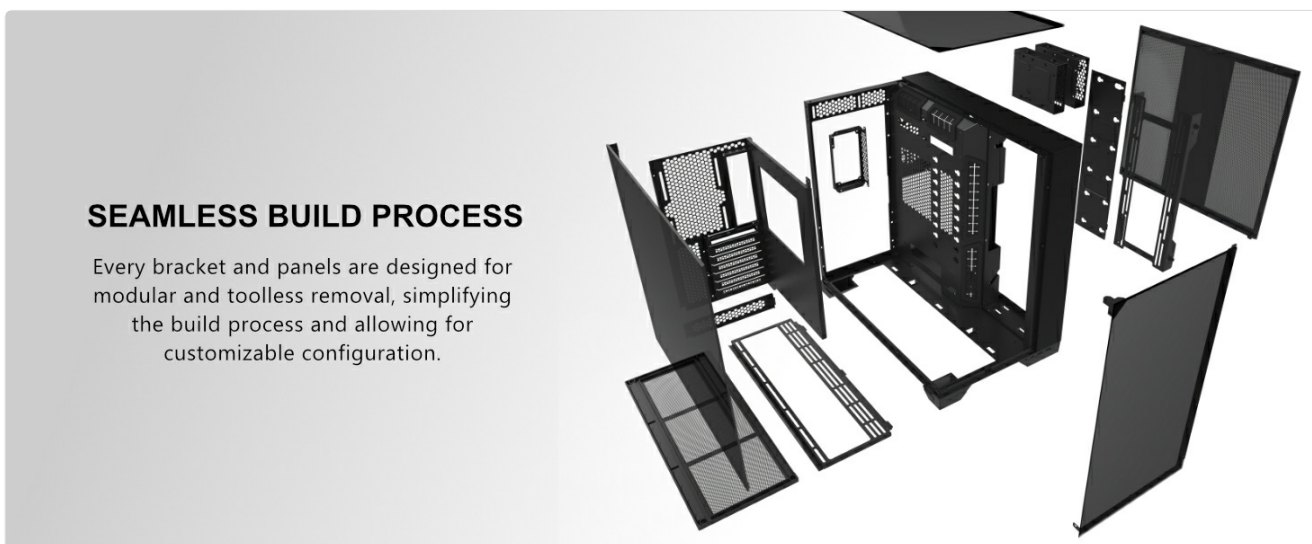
An exploded view demonstrating the modular and tool-less removal of brackets and panels for a seamless build process.
